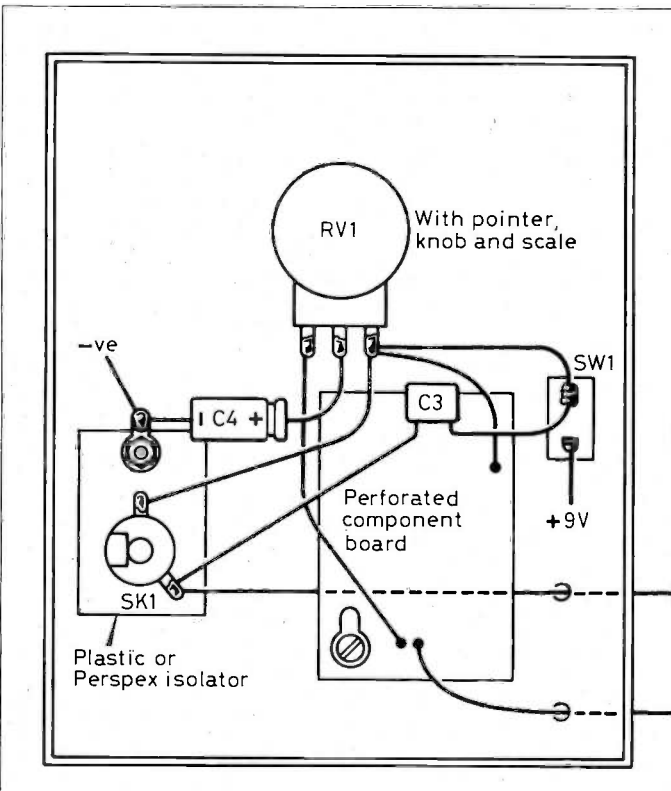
Layout of the parts inside an aluminium box. The earpiece socket is insulated from the case.
